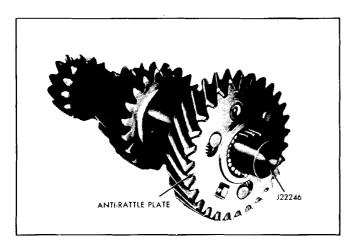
A-32 Loading Bearing Rollers into Countershaft Gear
